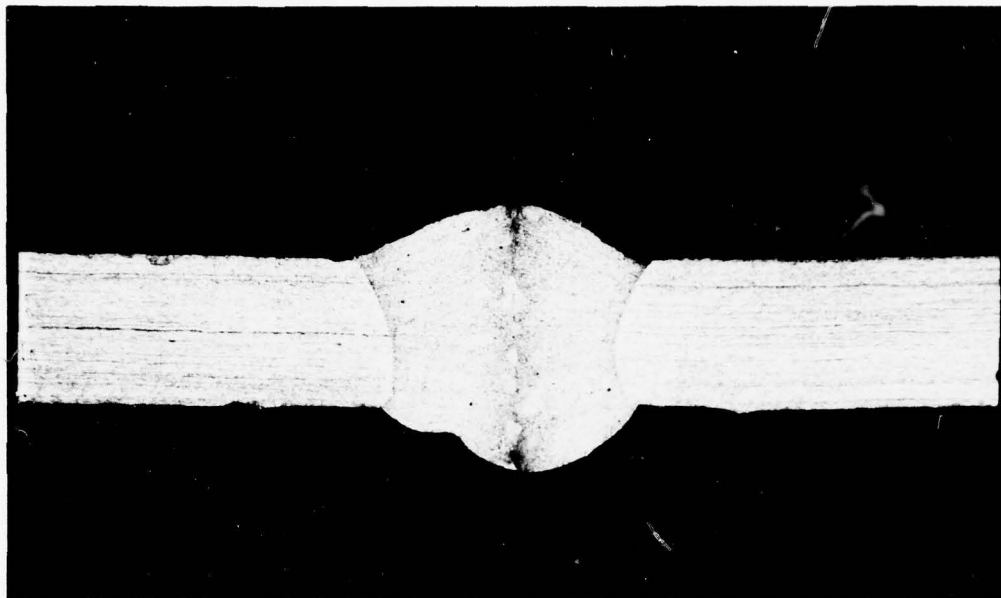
AC MIG welding. Typical welded sections in various thicknesses of aluminium with joint preparation superimposed.
